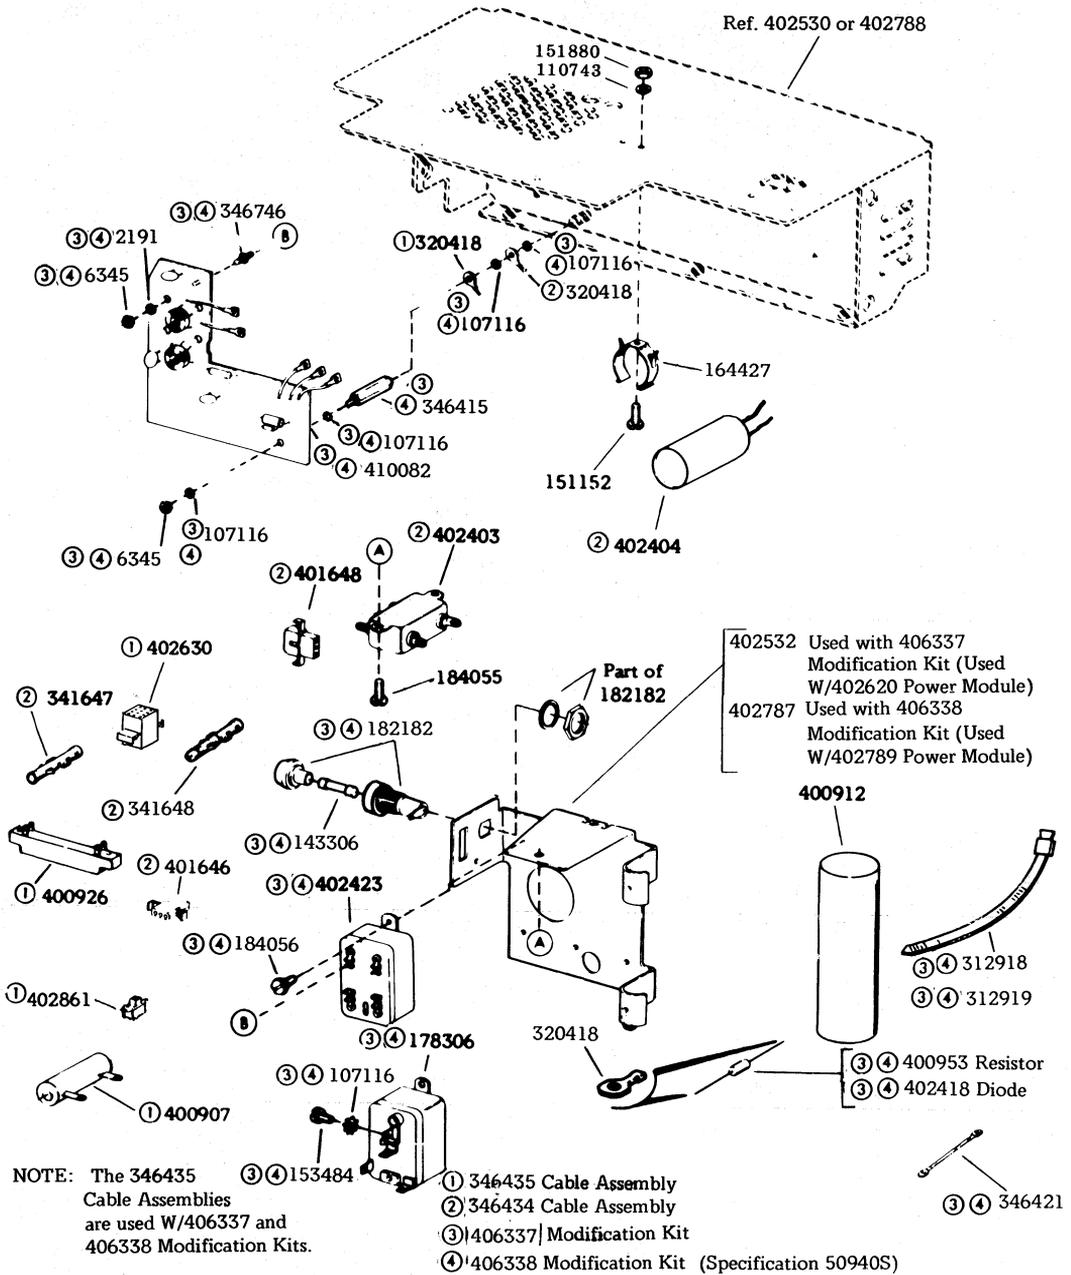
402620 and 402789 Power Module Assemblies (Late Design) (Tractor Feed - 80-Column) (Cont.)
